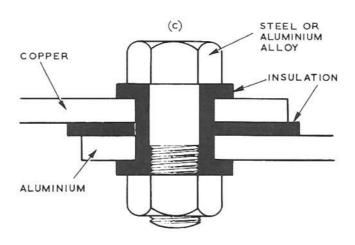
Dissimilar metal corrosion (bolted and riveted joints)
